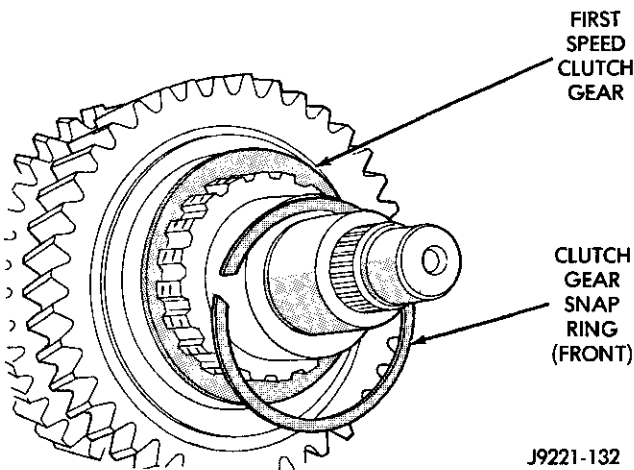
First Gear Clutch Gear Front Snap Ring Removal
